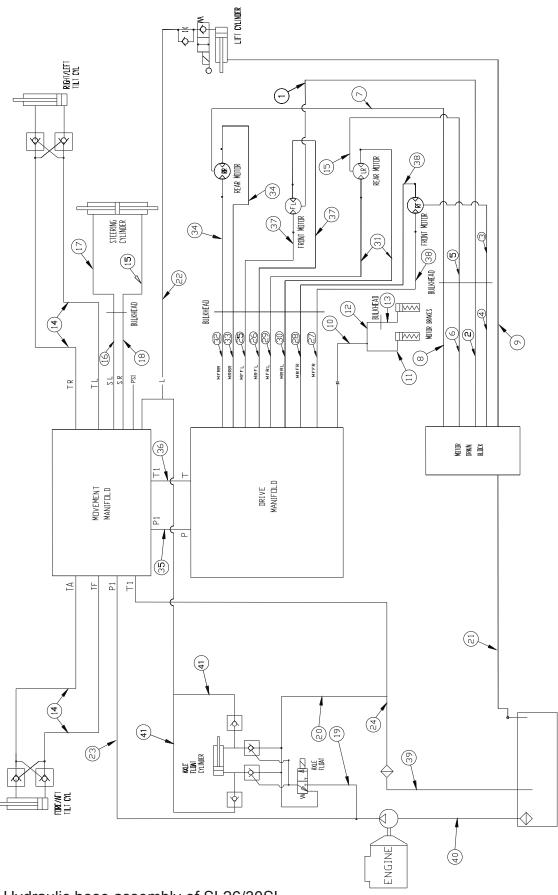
Hydraulic hose assembly of SL26/30SL
